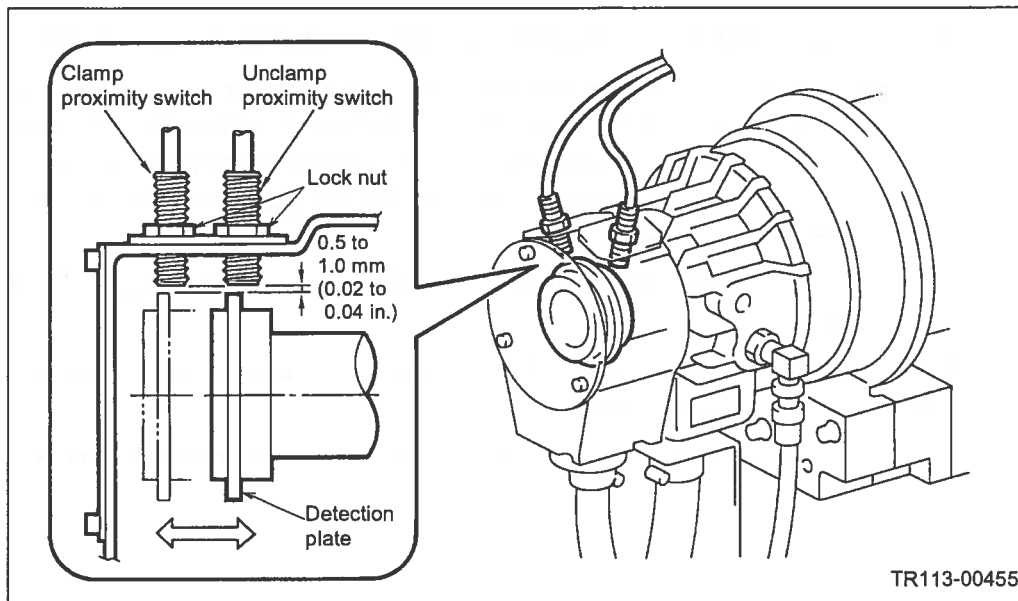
Main spindle chuck clamp/unclamp proximity switches
